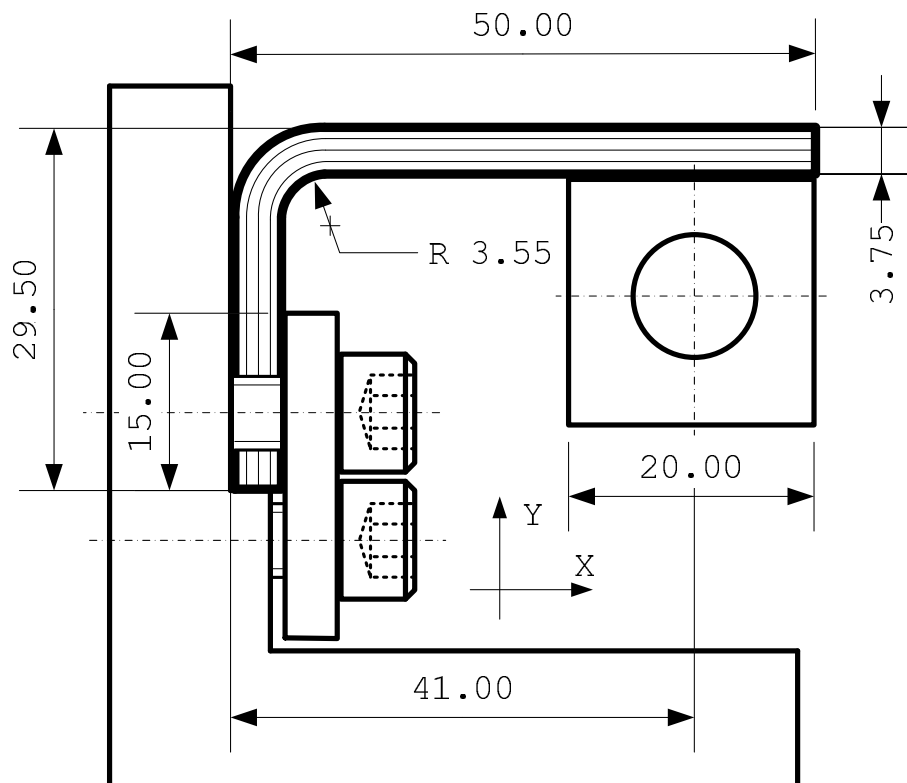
Test design of the L-shaped curved laminate with a  $[0_3/90_3/0_3/90_3/0_3]_s$  layup; clamped in a loading device and a loading block glued on (dimensions in mm).
